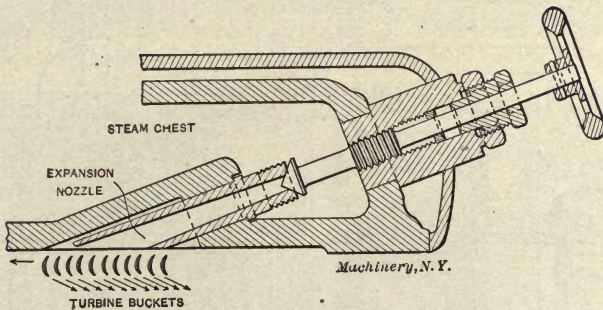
Section through Nozzle of a De Laval Steam Turbine
